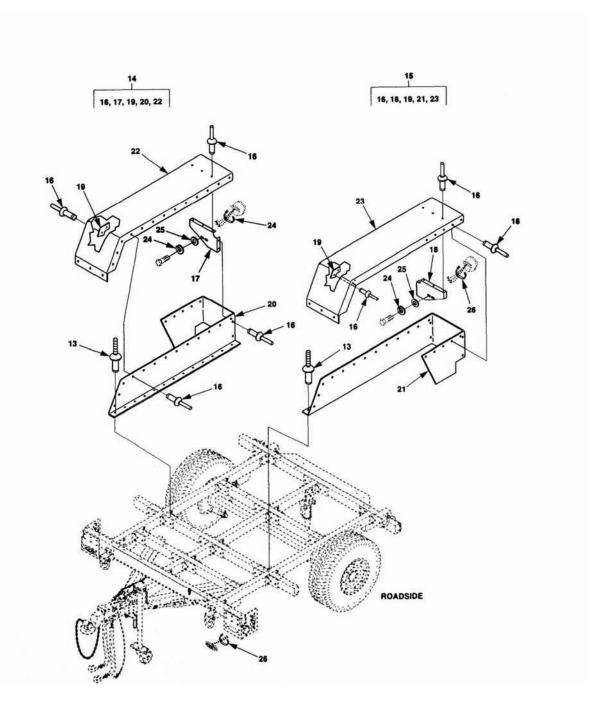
B. LTT Trailer, Mounting Rails and Fenders (Sheet 2 of 2).
